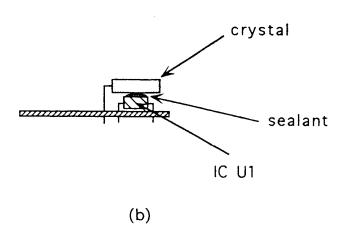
Pin Connections and Oscillator Crystal Mounting on Controller Board
